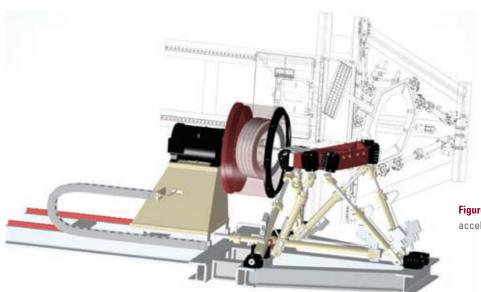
New LBF test machine for wheel accelerated life testing W/ALT
